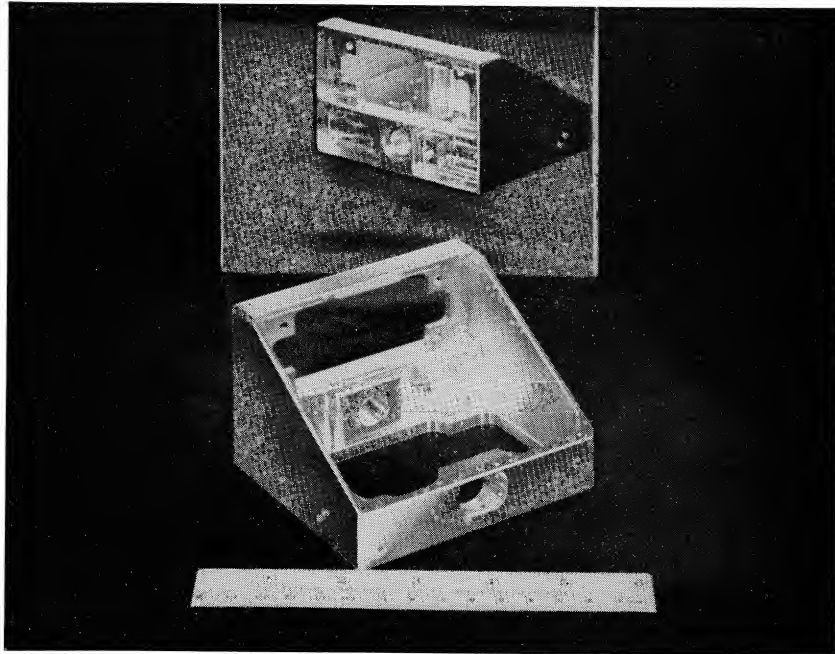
Only three work-holding fixtures are required to produce ten variations of these brackets. Each part is machined in three setups using three tape programs. Over 90 per cent of original part material is removed in a total machining time of seventy-six minutes.
